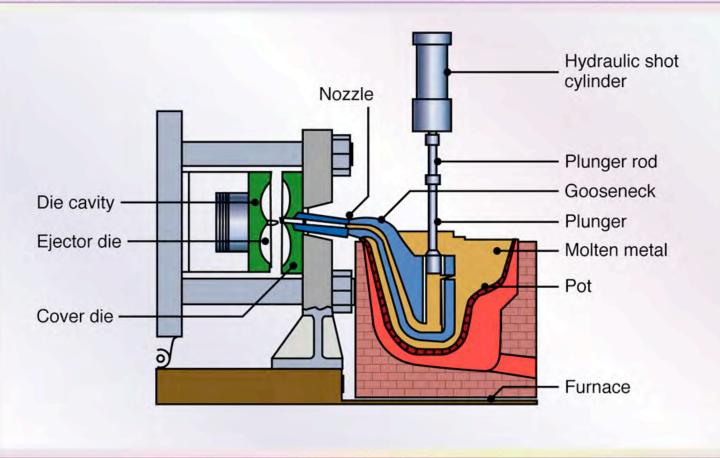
Schematic illustration of the hot-chamber die-casting process.
